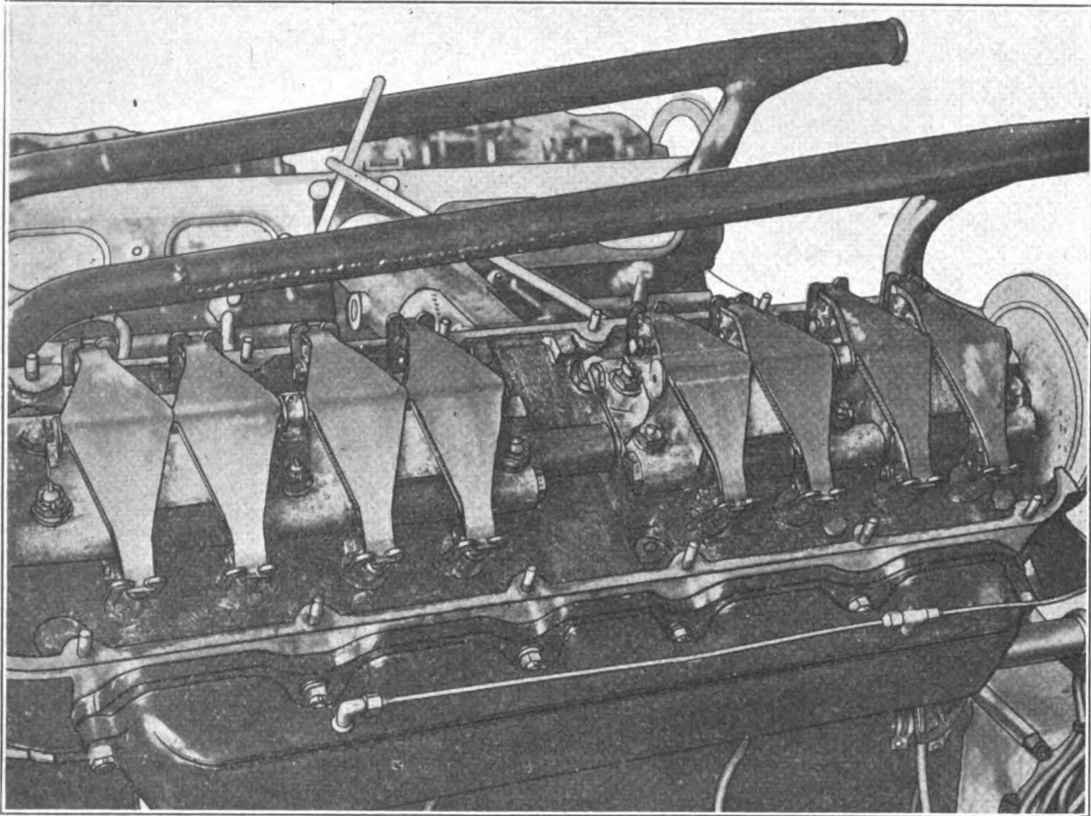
View of head ,with cover removed ,showing valve gear and flat springs.
